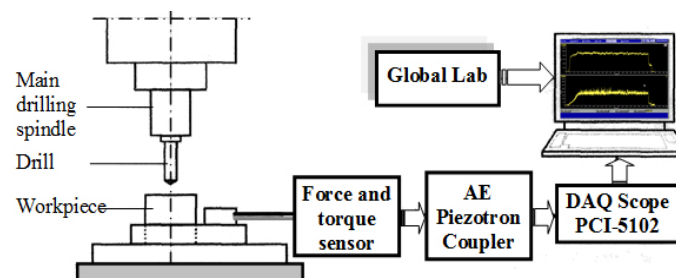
Set-up for measurement of axial force and torque in drilling [1]
